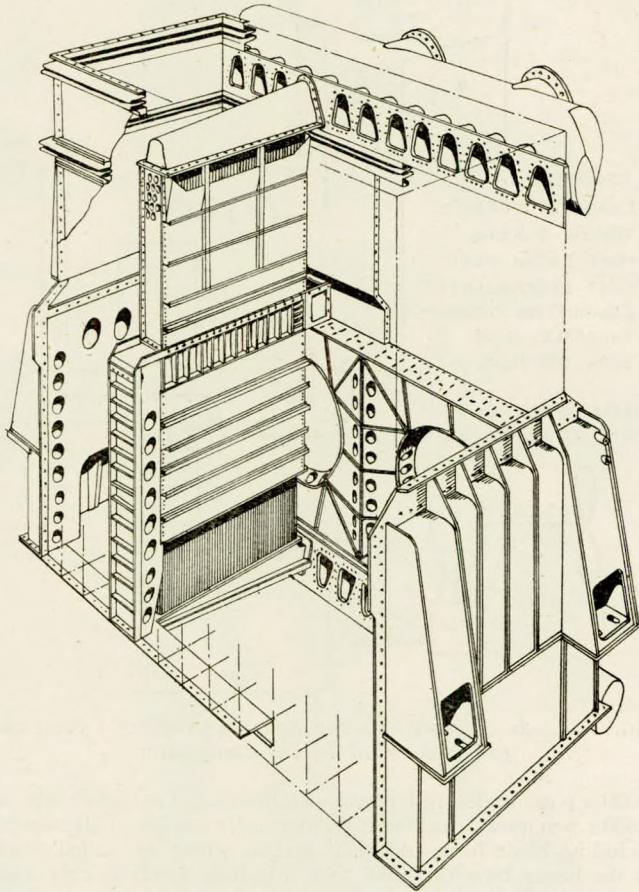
Perspective view of the charging set heat exchanger in a partially assembled condition. Only one of the twelve tube banks are shown in position
